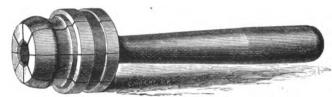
PATENT SPRING TUBE EXPANDER.
